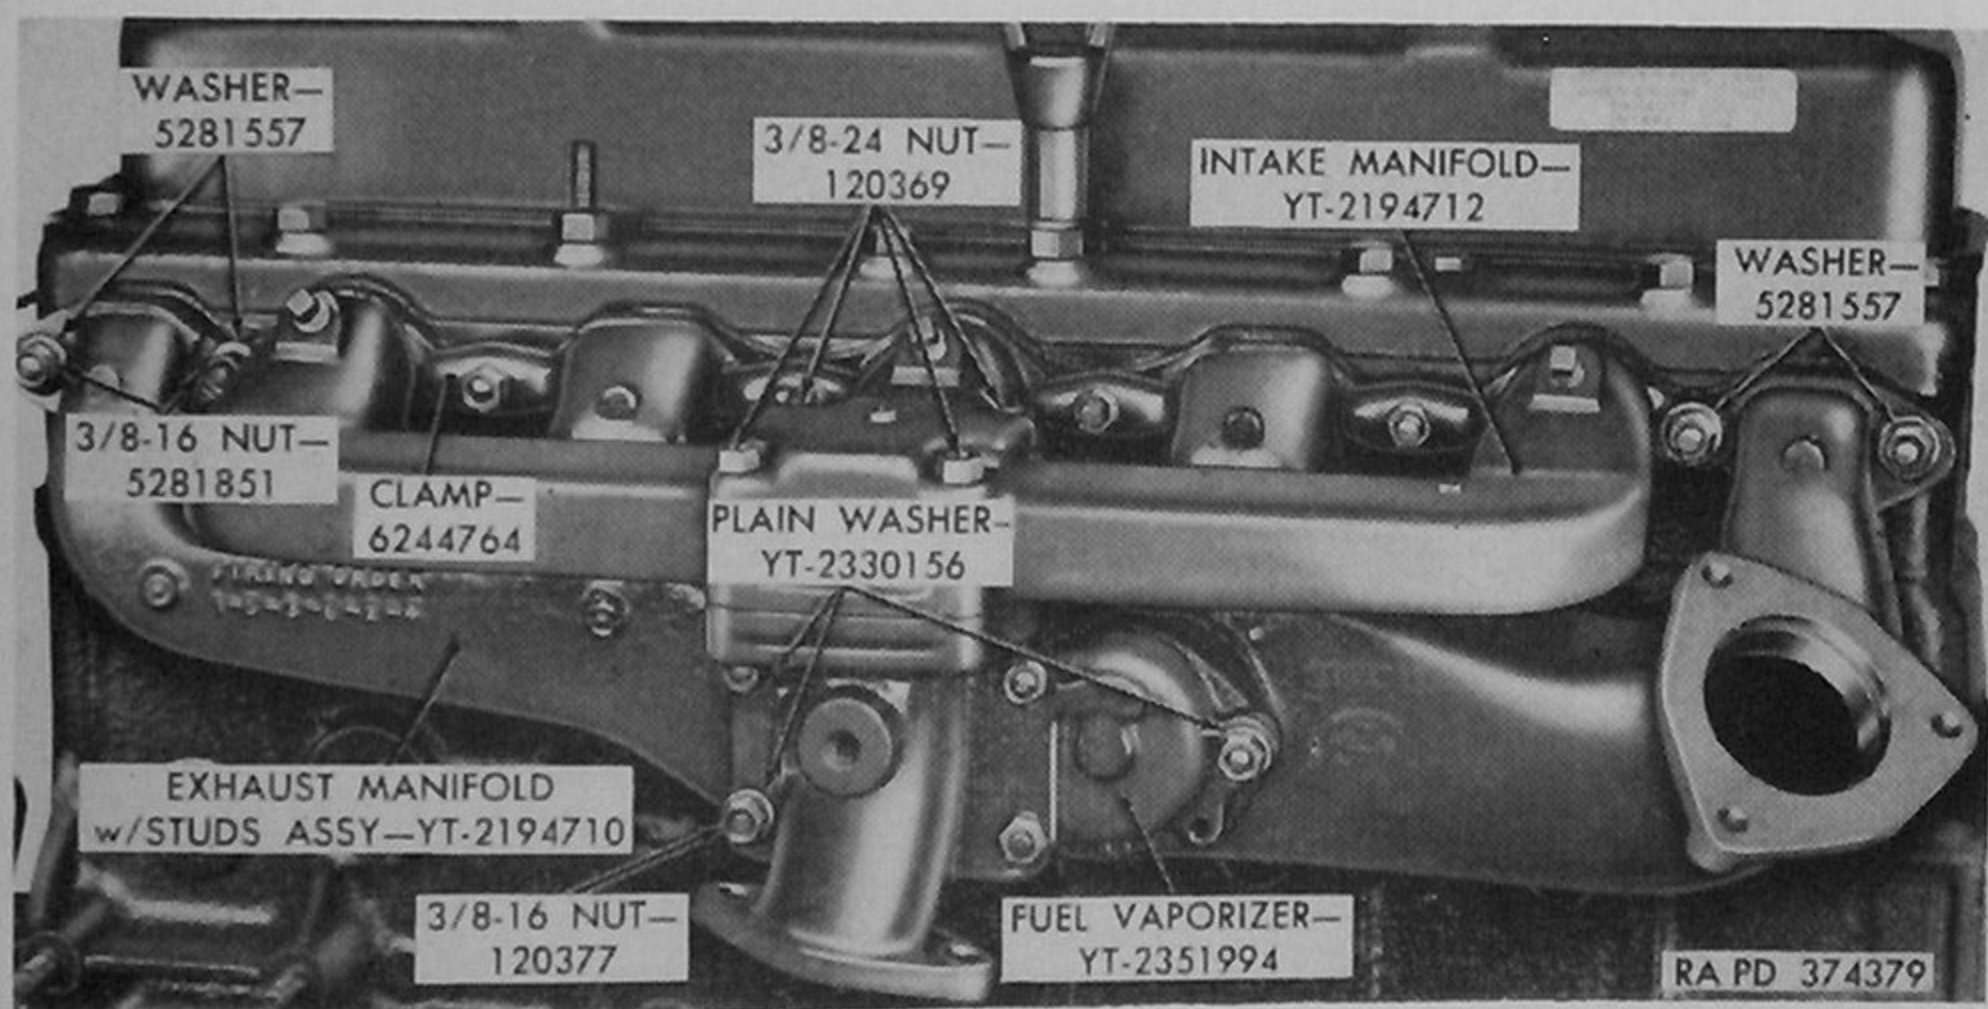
Intake and exhaust manifolds installed—engine assembly 8726920.
